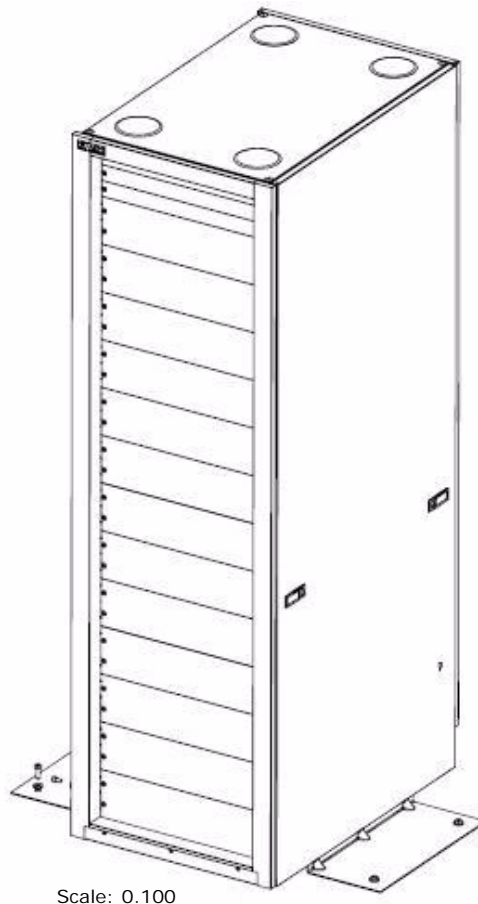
Example of Installing the Side Stabilizer Plates (Detail A)
